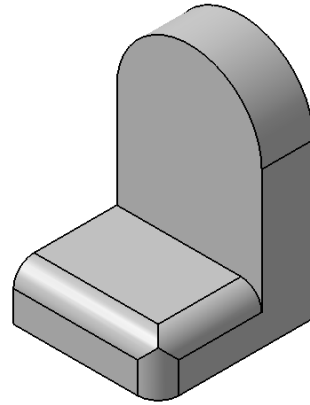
Resulting fillet with the Trim ribbons check box selected
